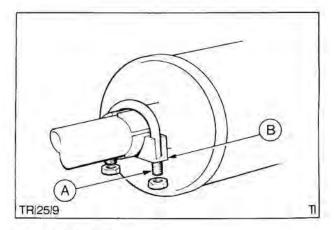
'U' bolt clamp A – 'U' bolt B – Clamp
